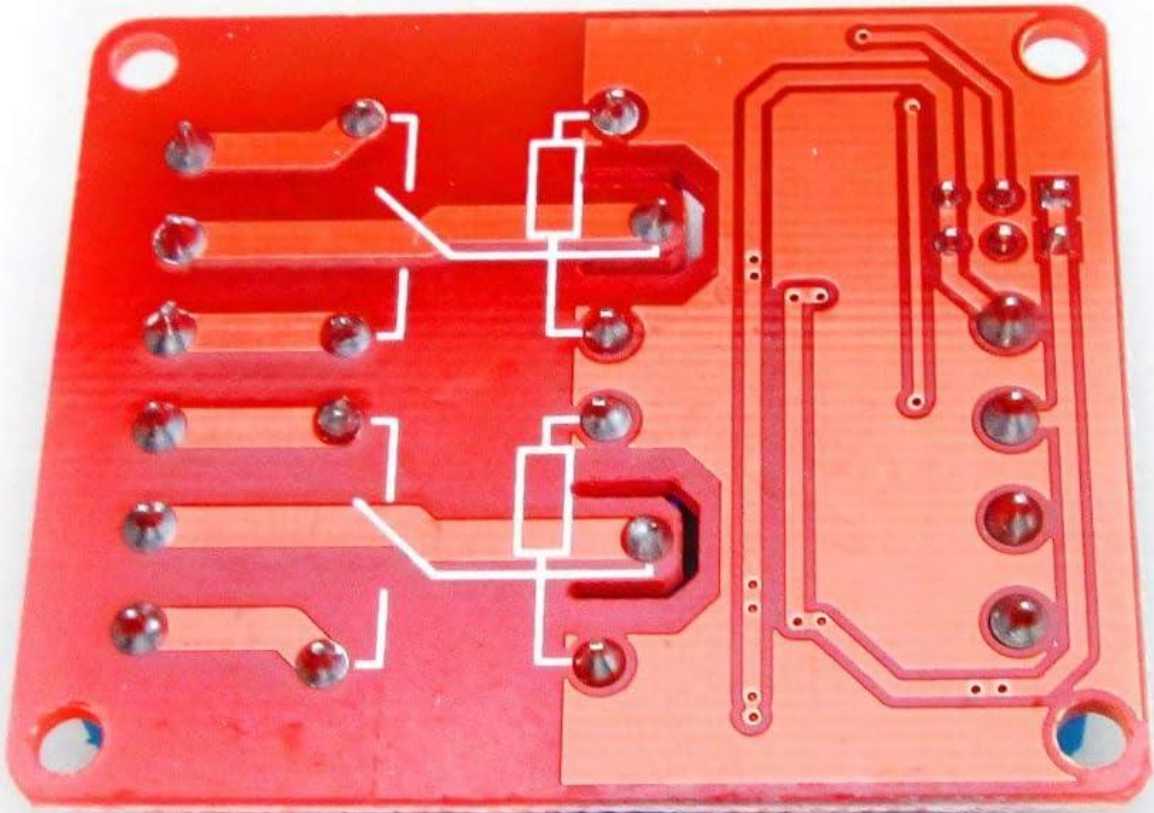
Underside of the relay module, illustrating the PCB traces and solder points for the components.
